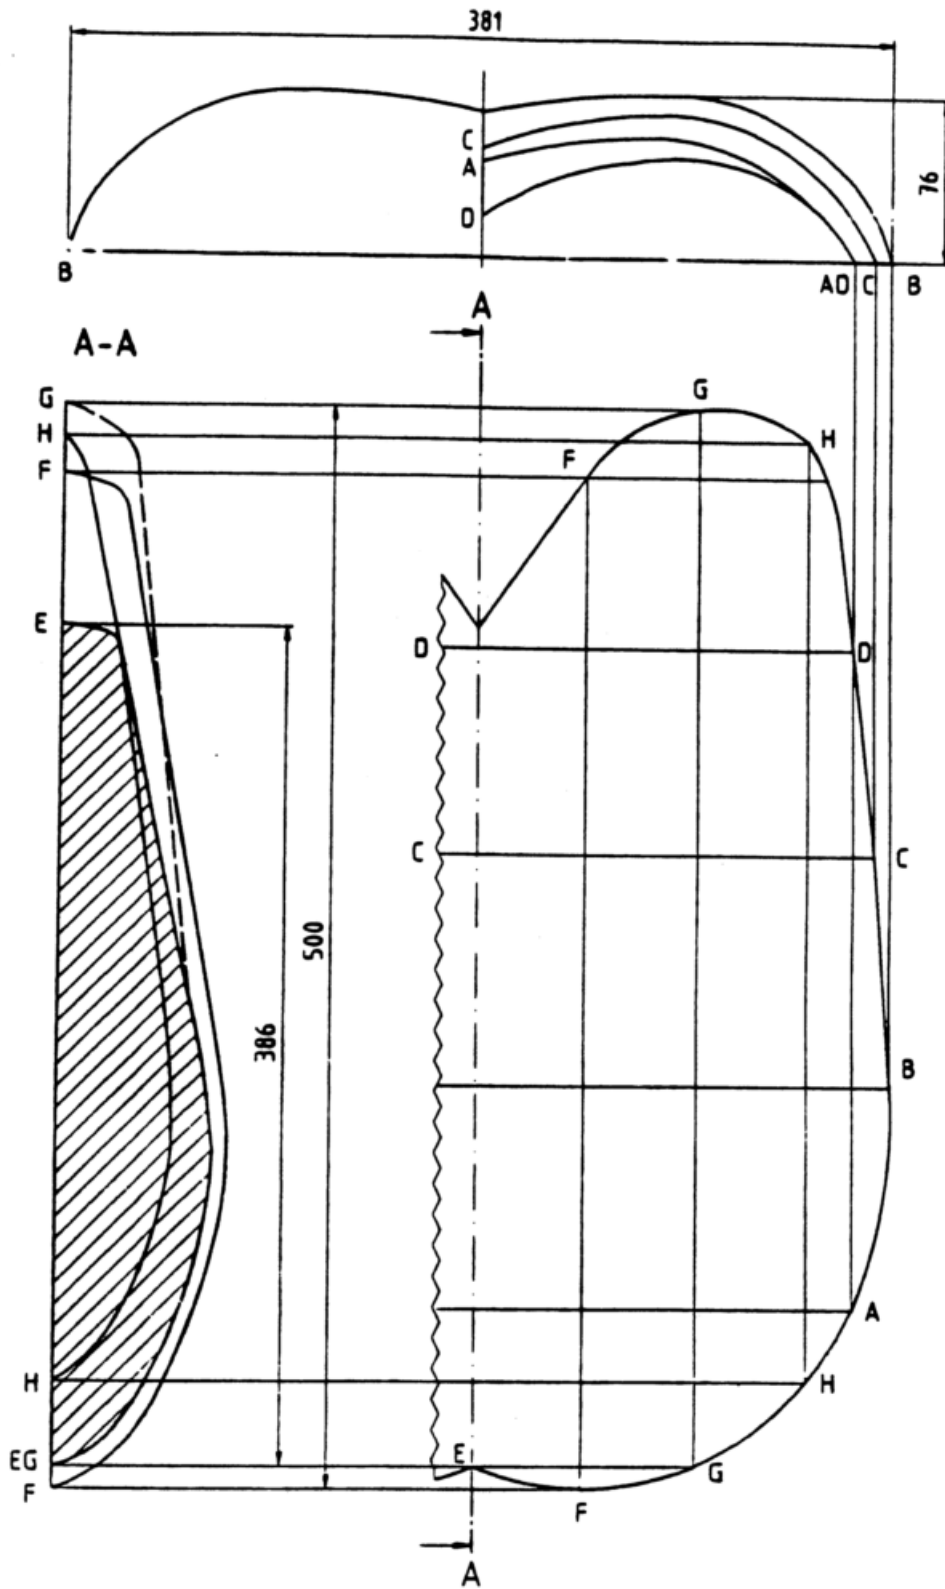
Seat loading pad geometry - Moulded fibre glass construction
